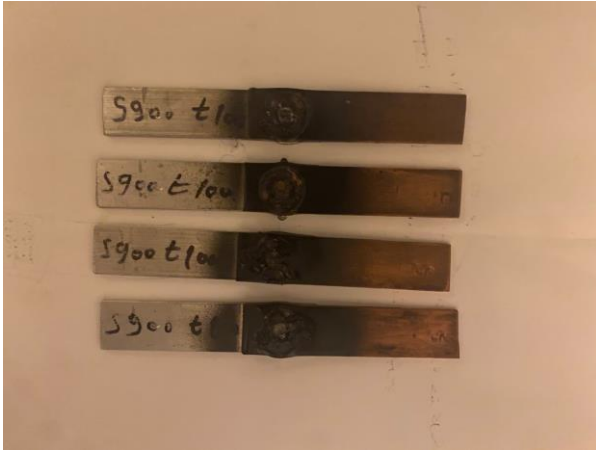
Macroscopic appearance of representative AA6061-T6/pure Cu lap-shear specimens welded at the optimum FSSW parameters (900 rpm, 100 s, square pin). The keyhole left by the tool pin is visible at the centre of each weld nugget
